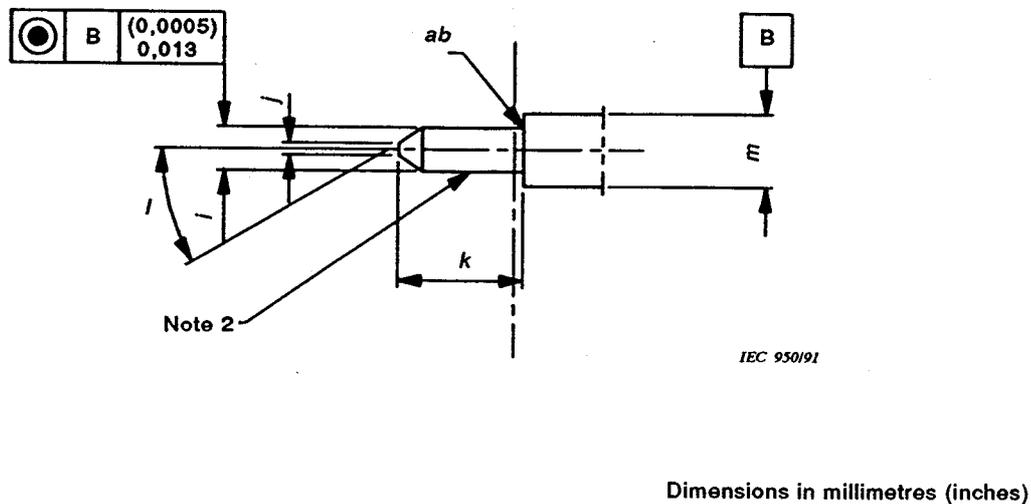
Plug contact (for dimensions, see table 1 which follows)
